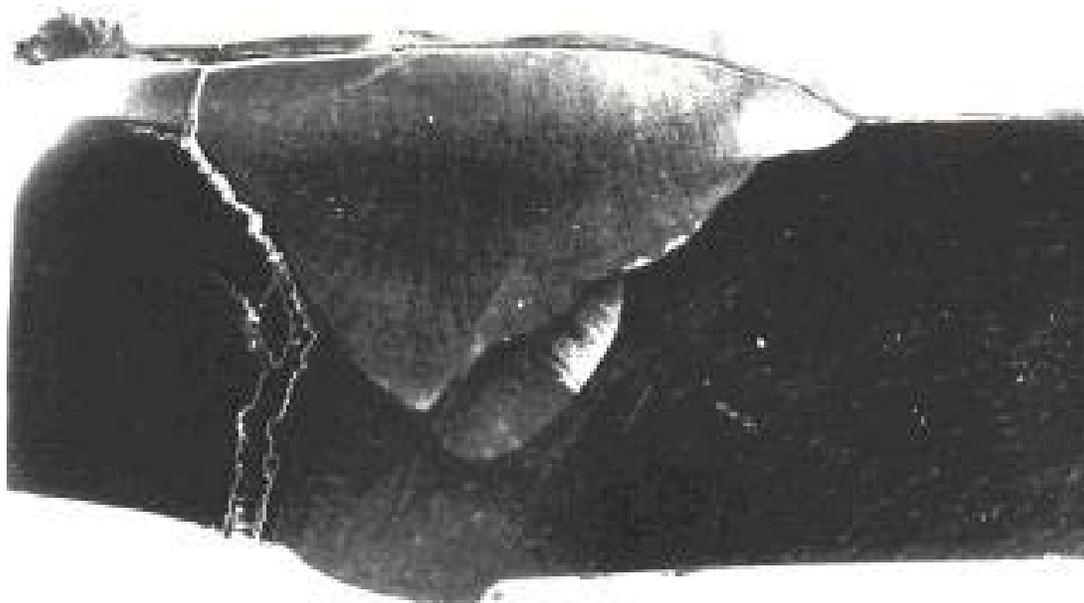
Cross-section of the catalyst withdrawal line attached to the flange in Figure 5-14 showing cracking in the weld HAZ. Mag. 3x.
